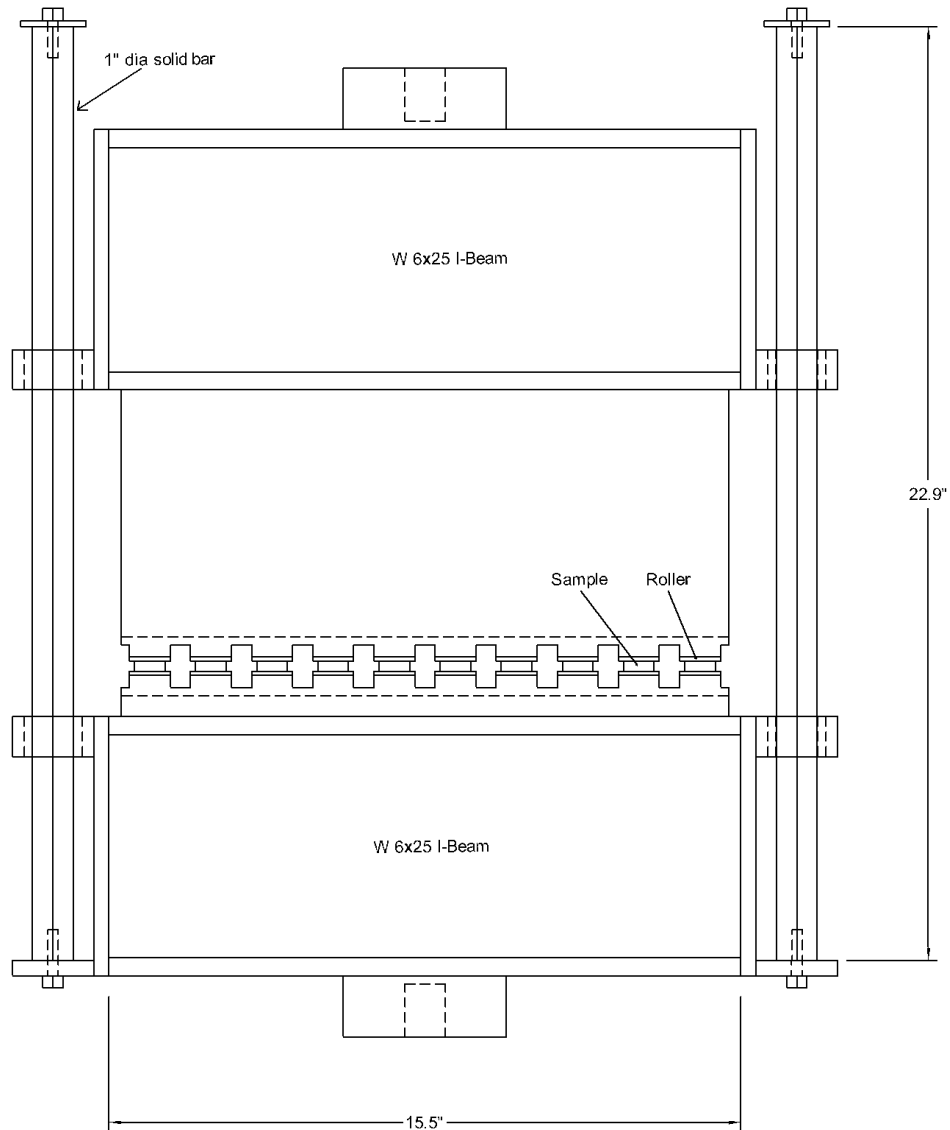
Design for Multi-Specimen Fixture (bath not shown)
